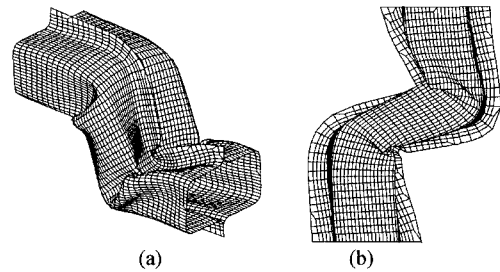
Deformed shapes of an S-rail with all forming effects: (a) isometric view; (b) front view
